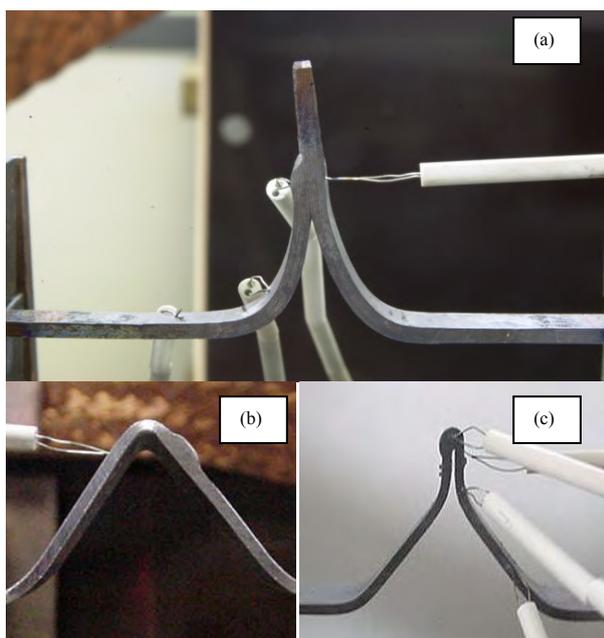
V-shape test with weld specimen configuration ((a) lap joint; (b) butt joint; (c) edge joint)
